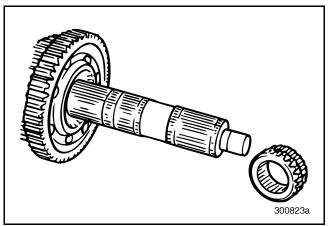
Removing Lo/Reverse Sliding Clutch from Mainshaft (T313L/T318L Shown)
